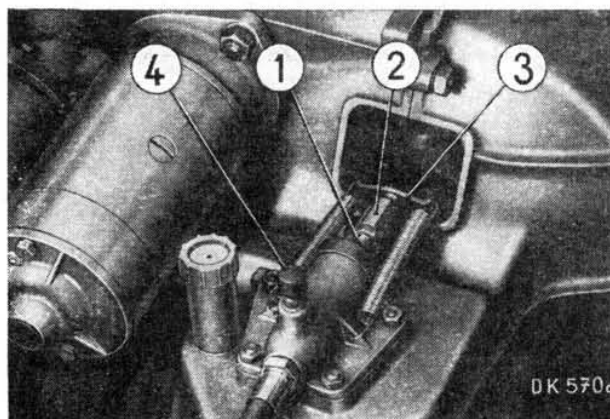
/1 - Adjusting Elements of Clutch Control Mechanism
